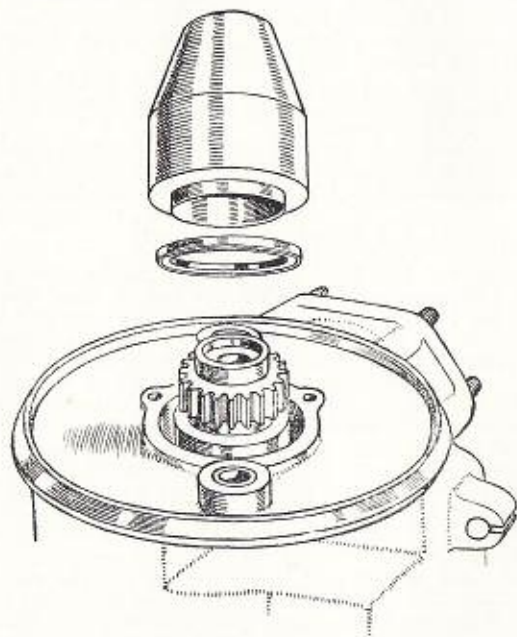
Using the special Oil Seal Tool LET 726 for fitting the brake side oil seal.
